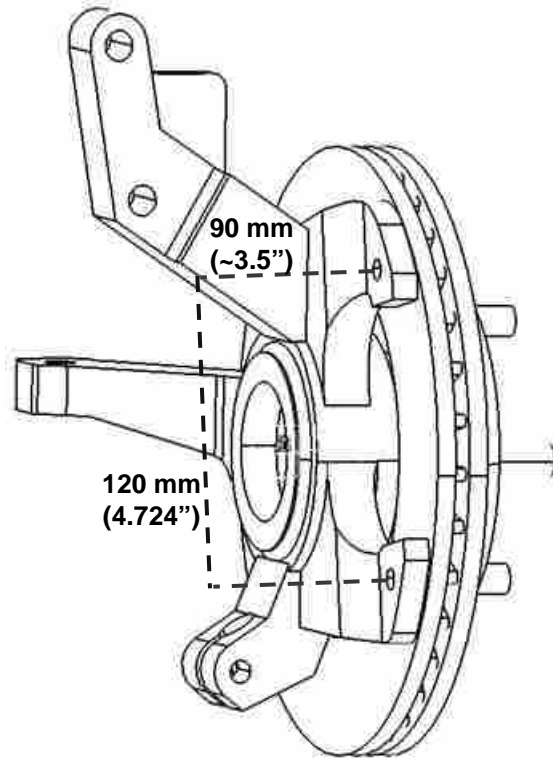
Physical space in which the MUSCLE Brake design must fit. For a compact car, this is 120 mm (4.724 in.) from center to center on the mounting bolts and about 90 mm (~3.5 in.) inboard.
